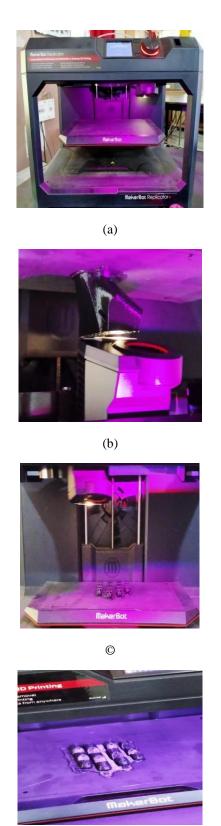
3D printer and Polylactic Acid material: (a) View of 3D printer (b) Polylactic Acid material assembly (c) Maker Bot (d) Mould of fingers
